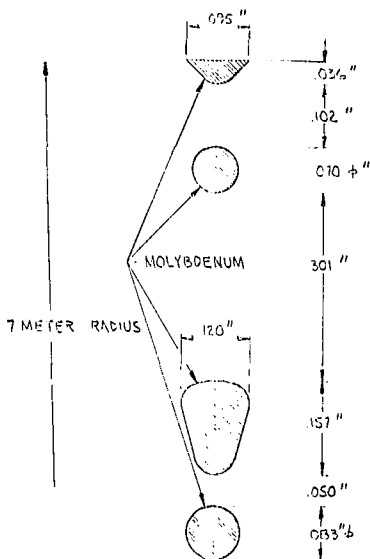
Cross-Sectional Shapes of Grid Wires Used in MFTF 80-kV NBS
